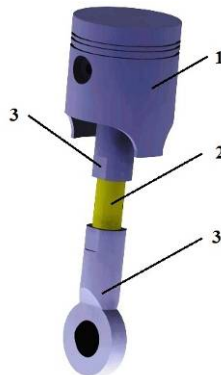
Piston group: 1 – piston, 2 – thread rod, 3. – rod end
